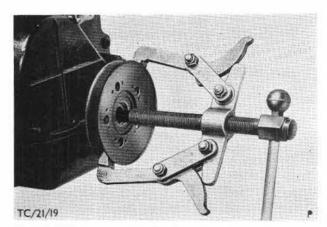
Withdraw crankshaft pulley using Special Tool 6132-A.
